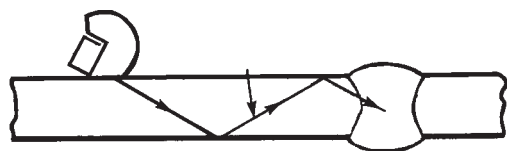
Technique 1, for Inspecting Butt Welds with Angle Beams
